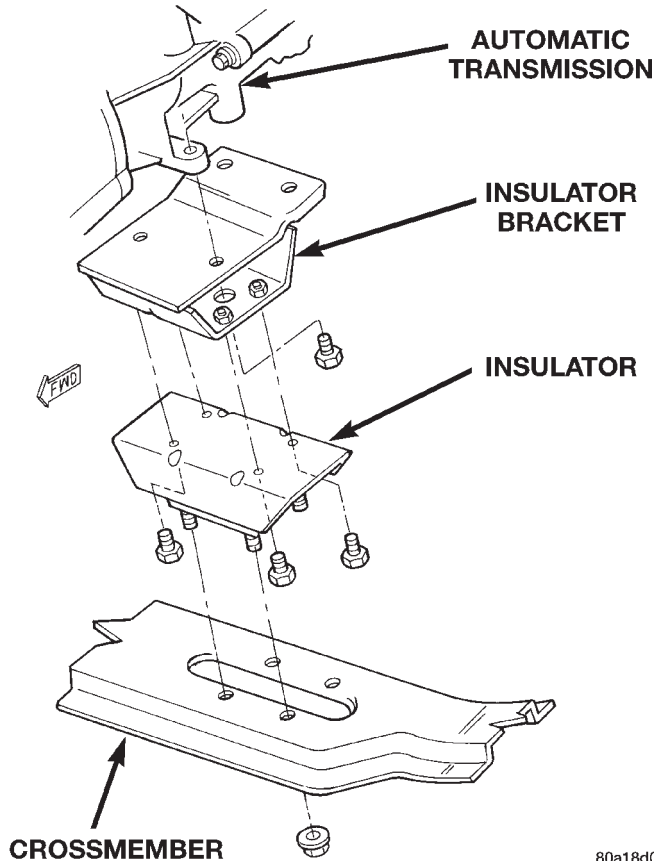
Rear Engine Mount Insulator Removal/Installation
